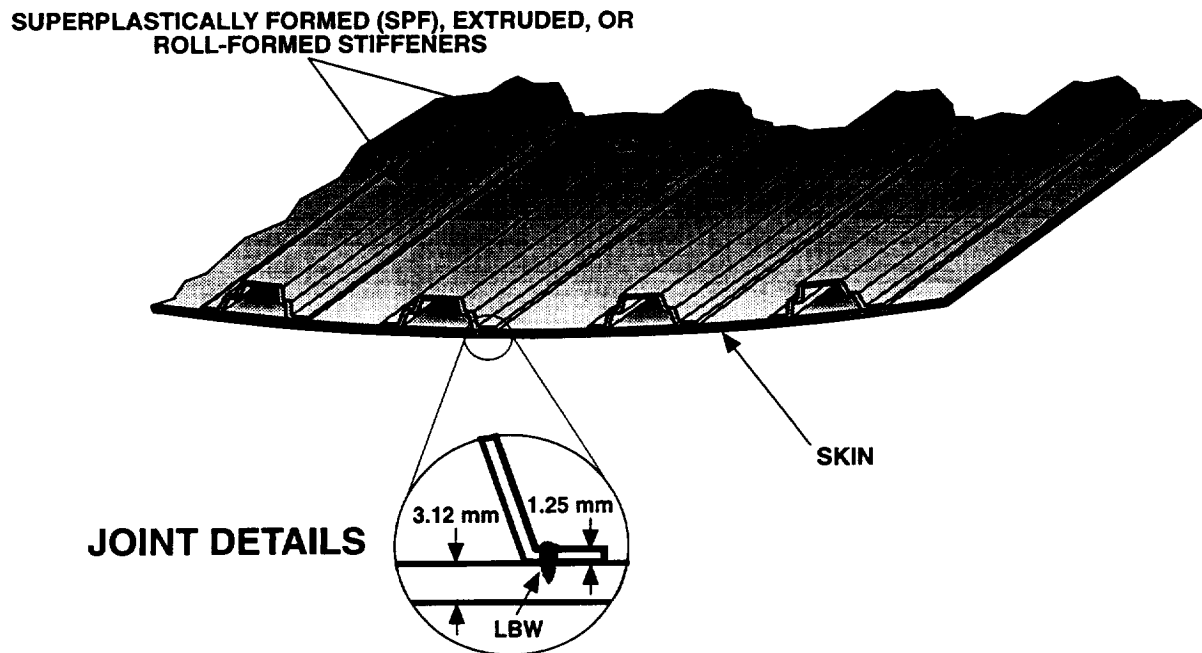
Schematic of Built-up Structure that may Utilize Laser Beam Welding to Join Stiffeners to Skin.
